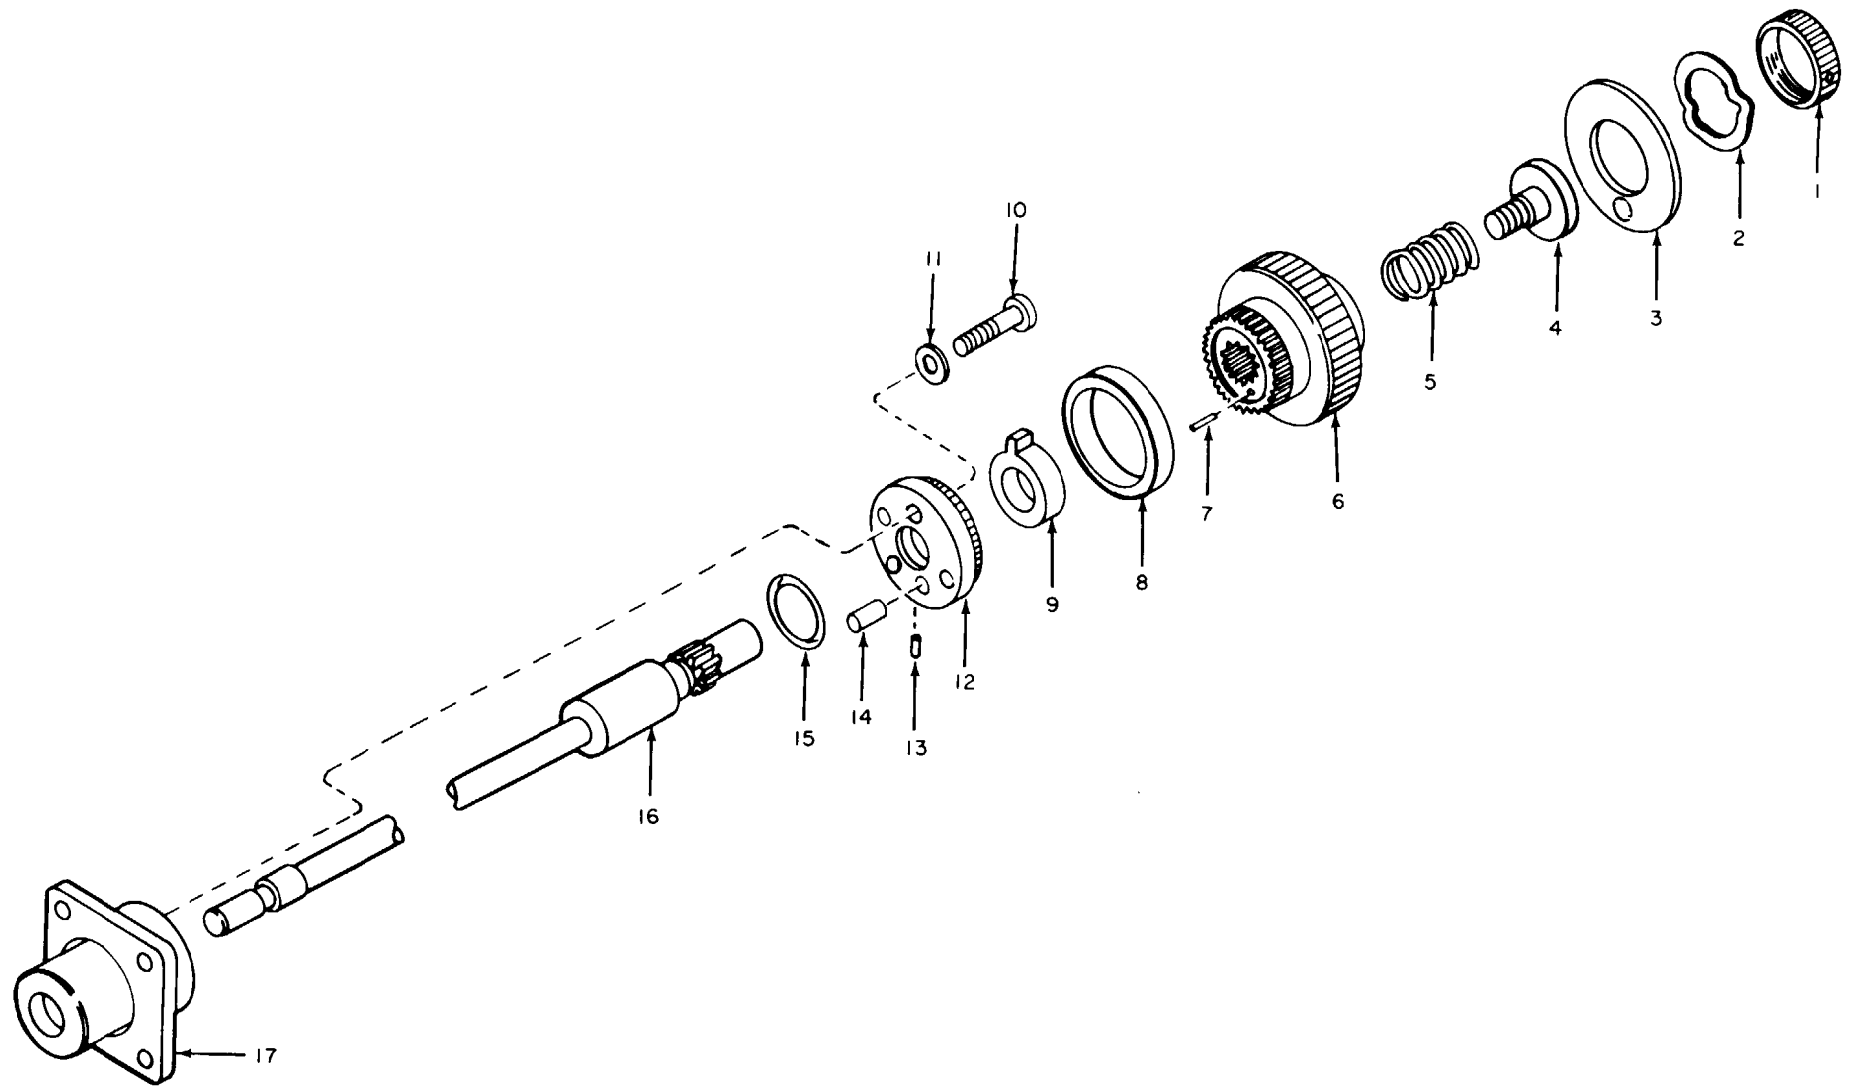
Boresight knob assembly (deflection and elevation)—exploded view.
